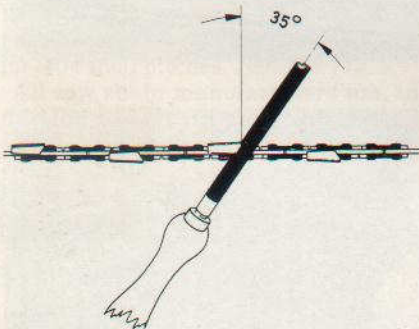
Angle of cutting face should be 35 degrees as shown. Insufficient top angle causes chain to cut roughly and dull very quickly. Excessive top angle causes side thrust and wear on sides of drive lugs.
